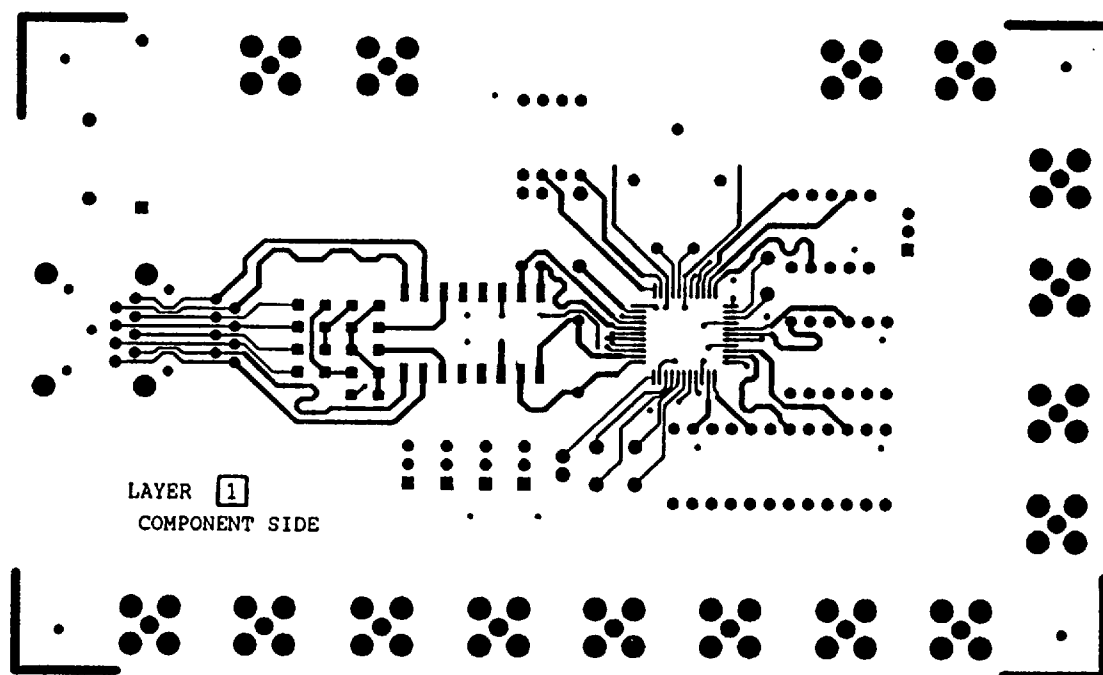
Evaluation/Test Circuit PCB Layer 1 Signal Traces
